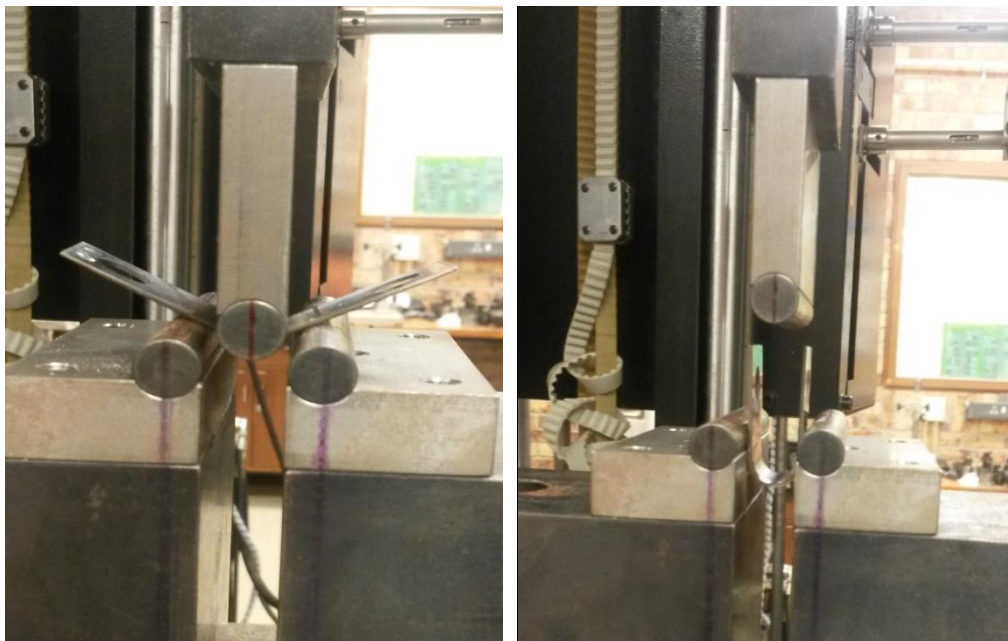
Fabrication of U-bend samples in a tension testing machine, stage 1 of 2 stage stressing method
